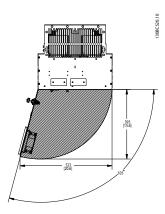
Front Clearance of IP21/IP54 Enclosure Type, Frame Size D2h, D7h, and D8h
